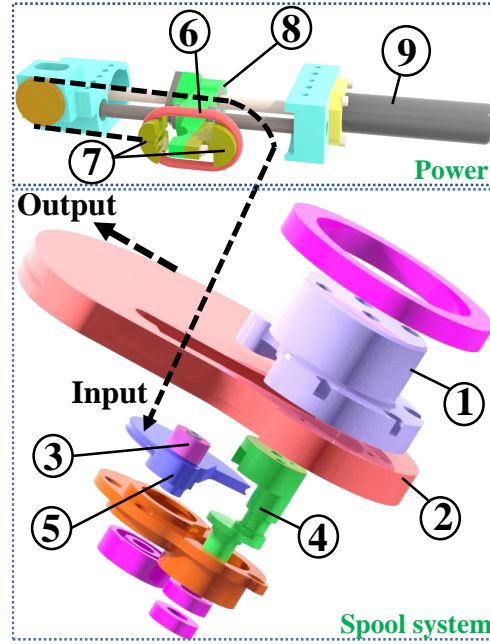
Mechanical design of the POC prototype. 1- Flange, 2- Spool, 3- Roller, 4- Eccentric shaft, 5- Camshaft, 6- Bungee, 7- Supports, 8- Plate, 9- Motor.
